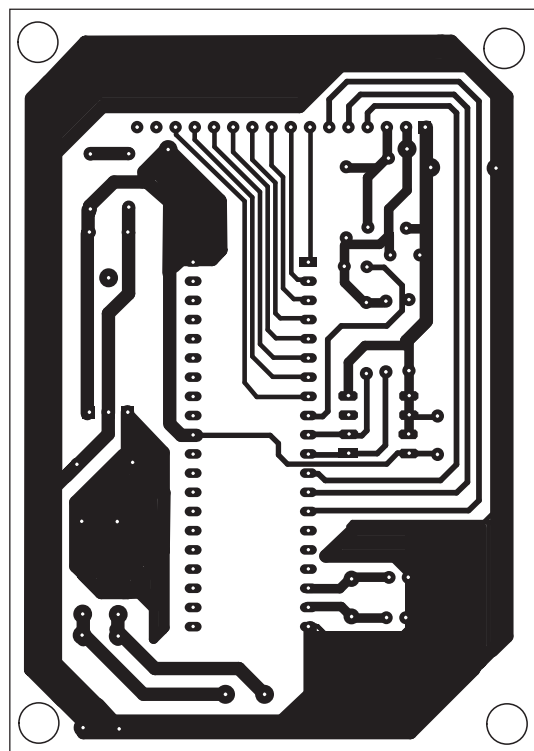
Solder-side PCB layout for temperature indicator using AT8952
